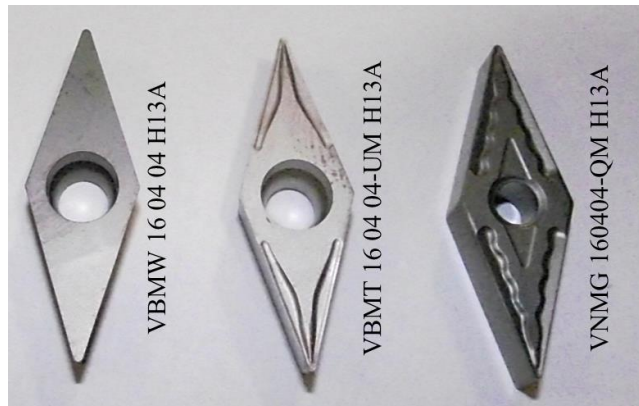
Inserts used in the cylindrical micro-cutting tests.
